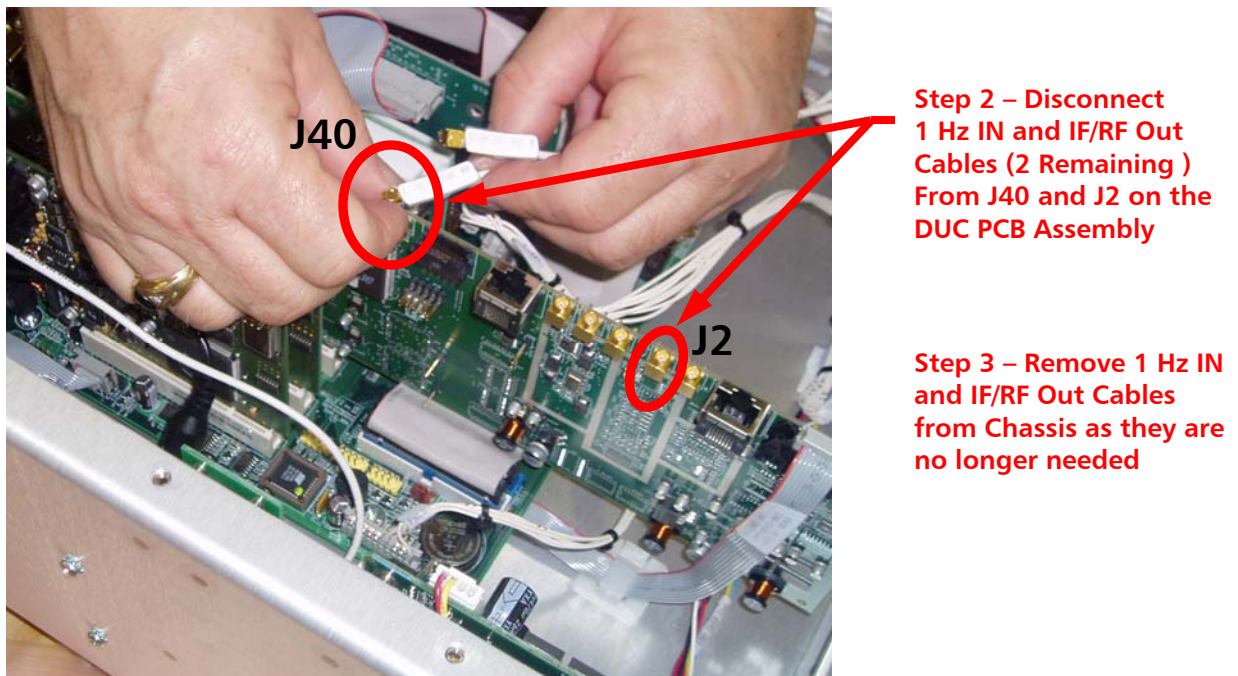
Disconnect 1 Hz IN and RF/IF Out Cables from DUC PCB Assembly
